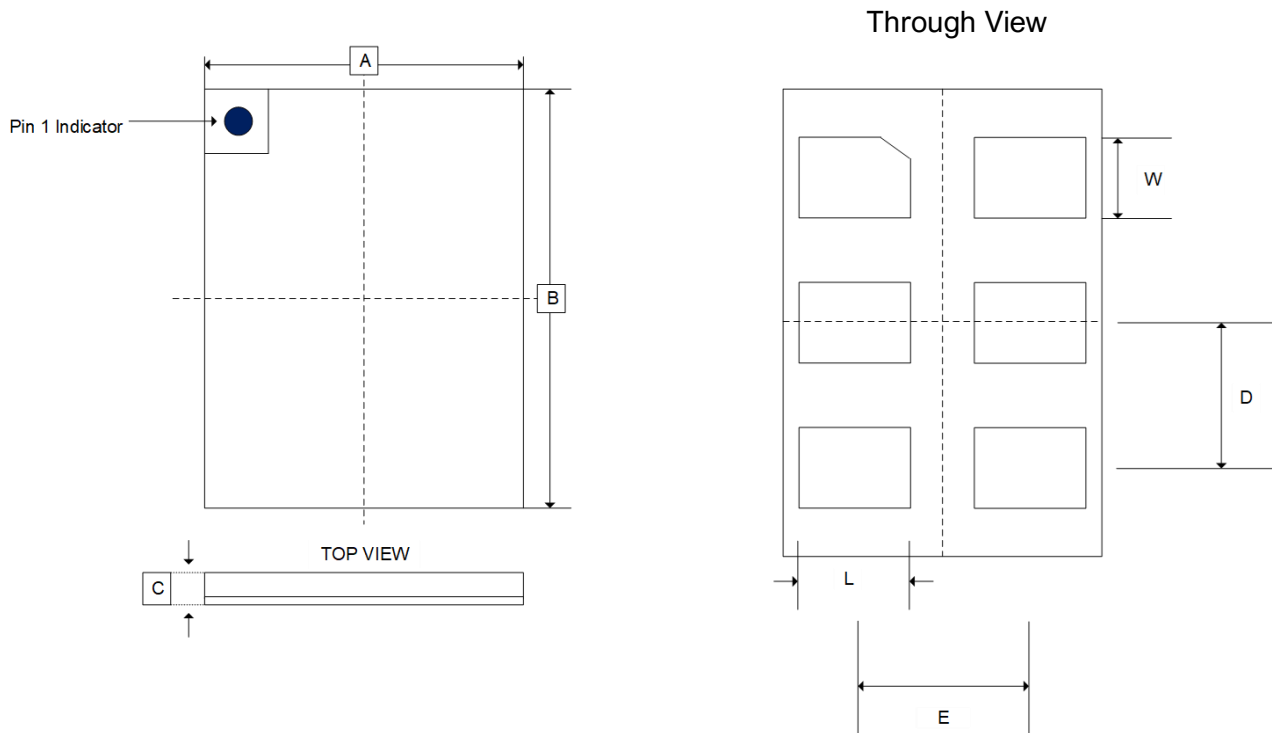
MS1180 Packaging Drawing (2.0X1.6 mm)
